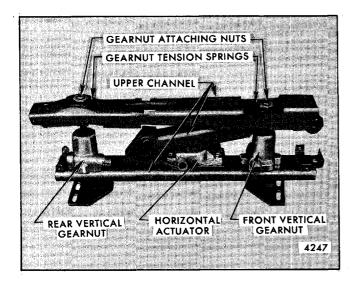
Six-Way Seat Adjuster - A, B, C (Except 6CB69) and E Styles
